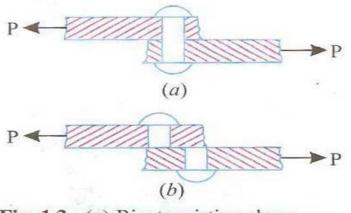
(a) Rivet resisting shear. (b) Rivet failure due to shear.
